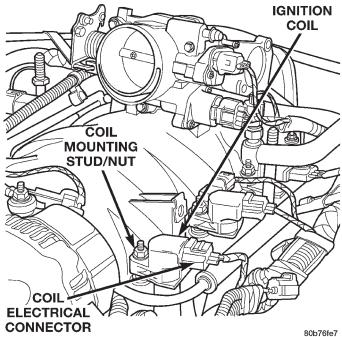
Ignition Coil Location—4.7L V–8 Engine
